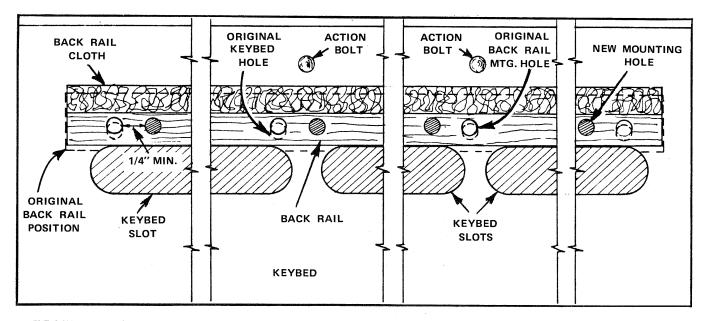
Drill new mounting holes in the Back Rail and Keybed.
